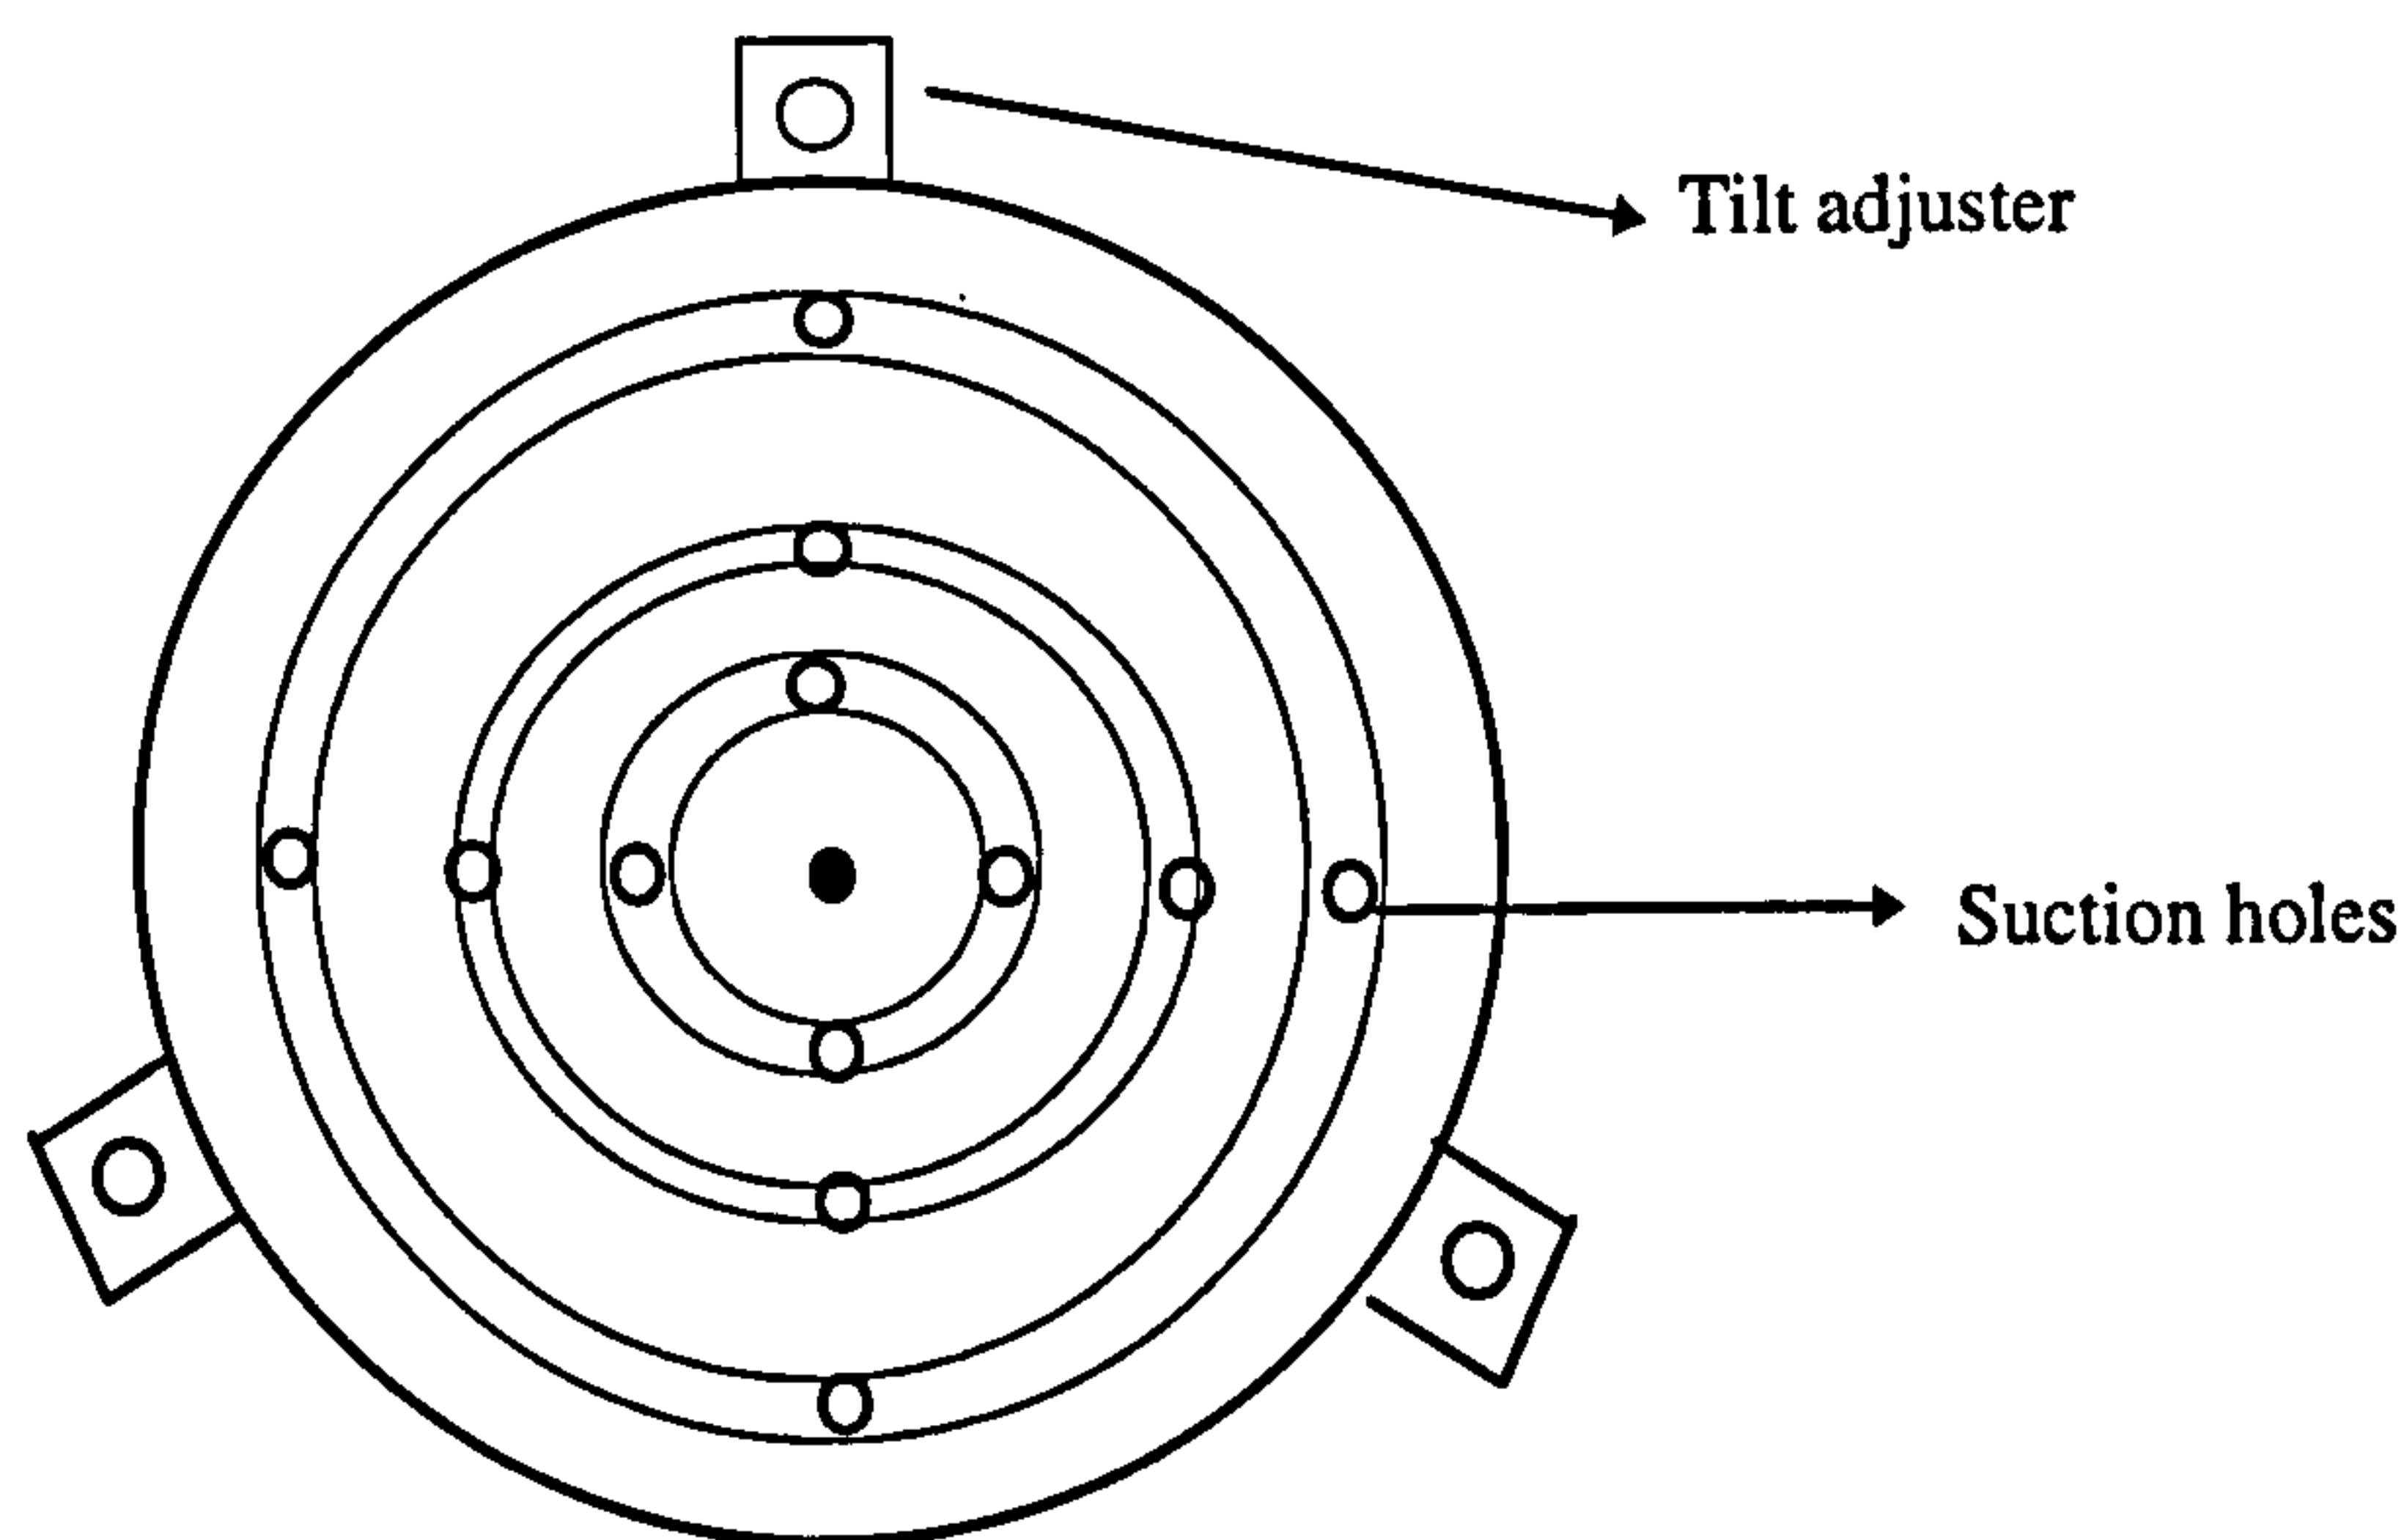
The Vacuum chuck arrangement used on the machine
